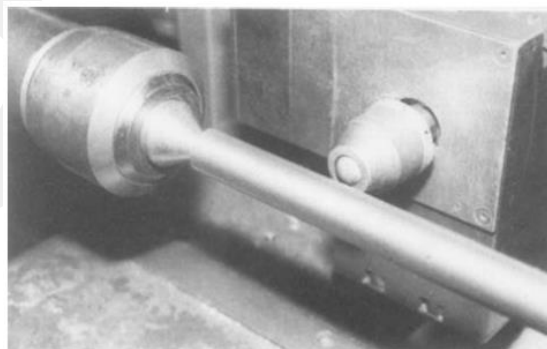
Roller burnishing setup showing the burnishing tool and the workpiece
